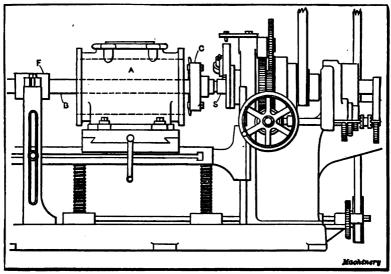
Cylinder mounted on Korisontal Machine for Boring
